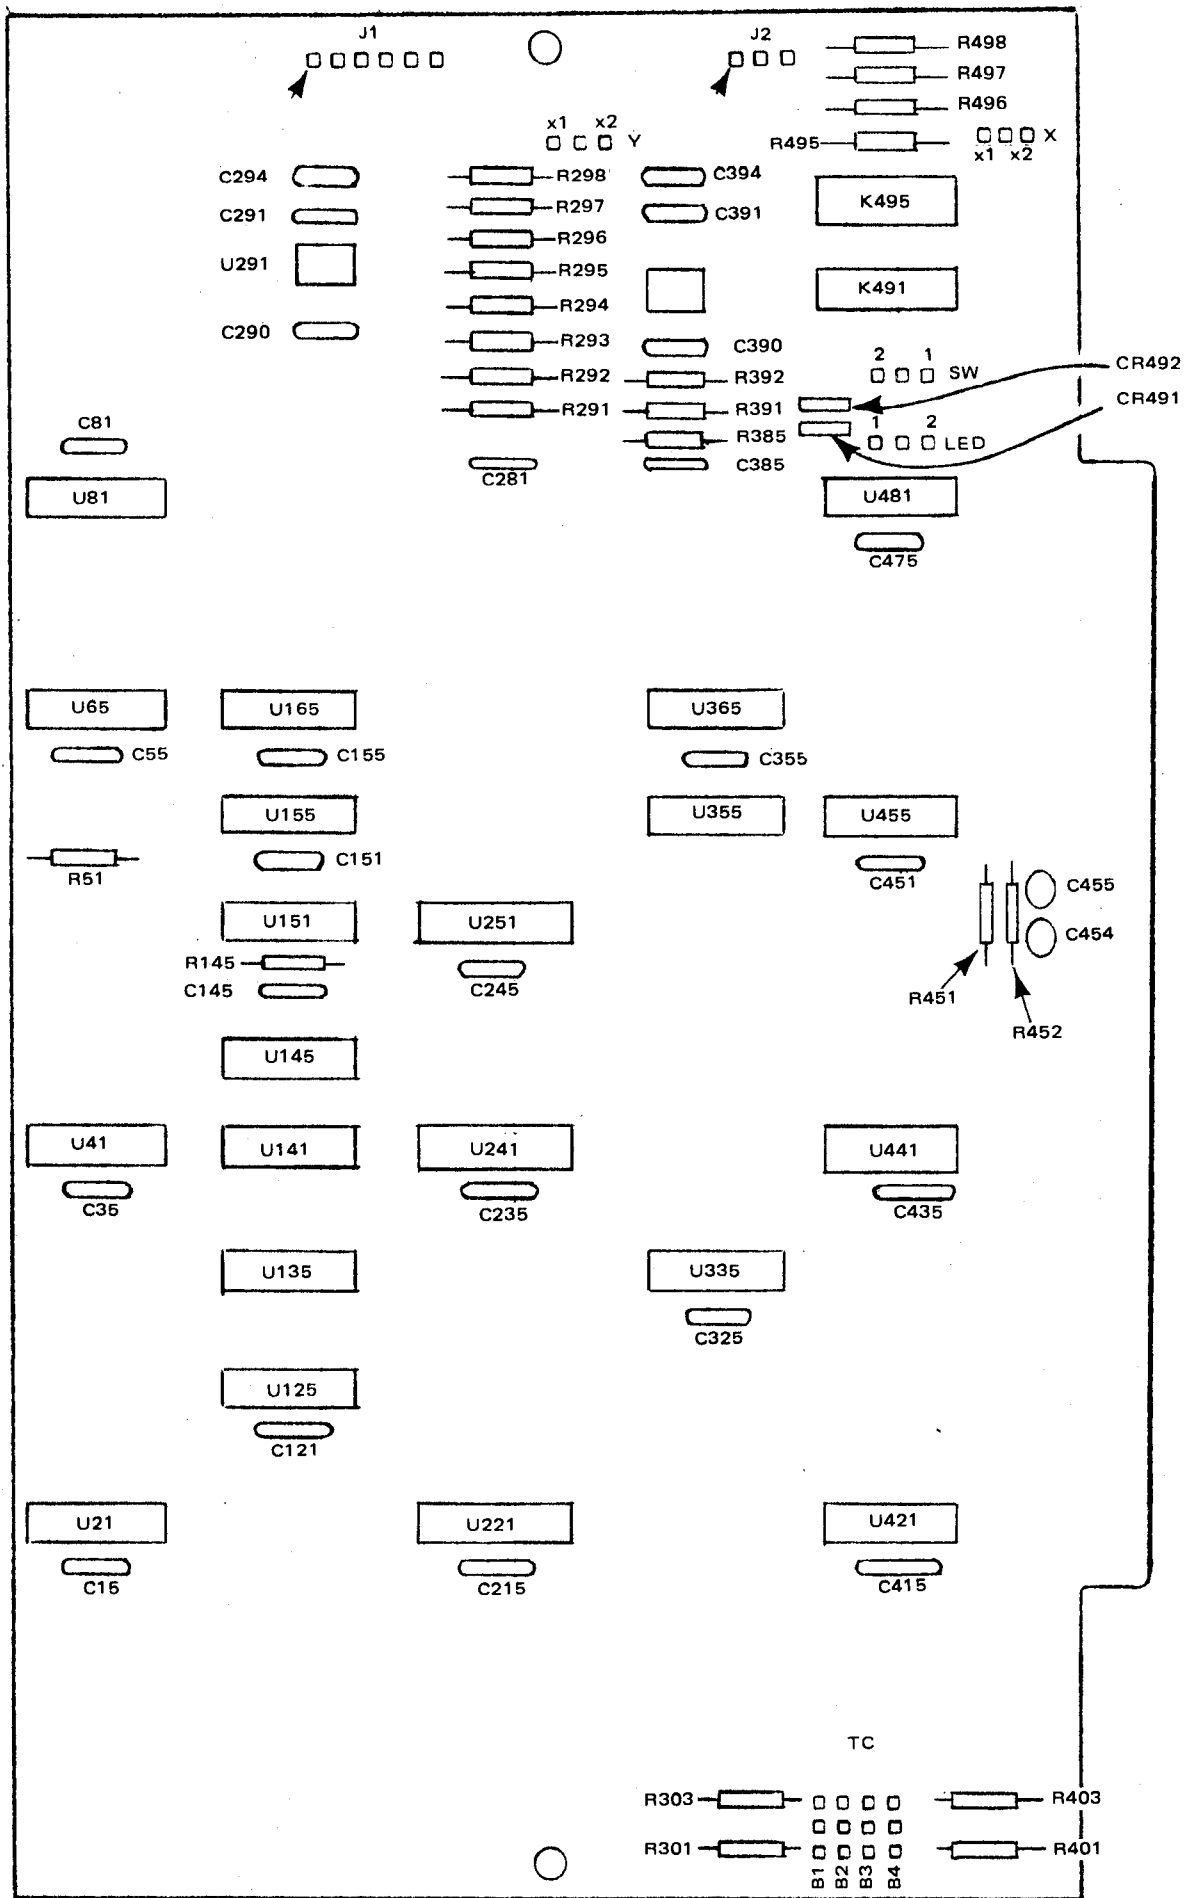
INTERACTIVE BUFFER BOARD LAYOUT.
